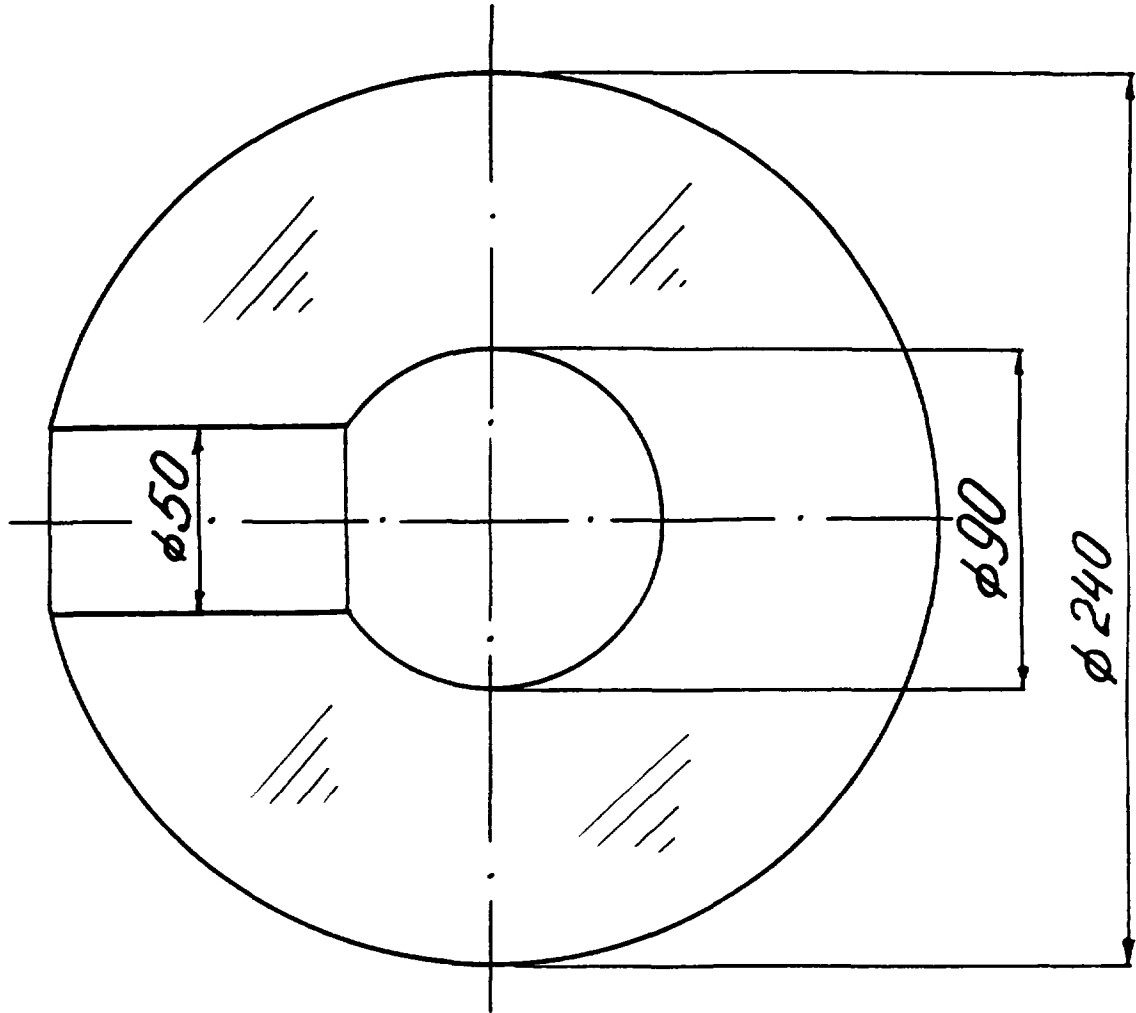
Geometry of Pb assembly (sizes are given in millimeters).
